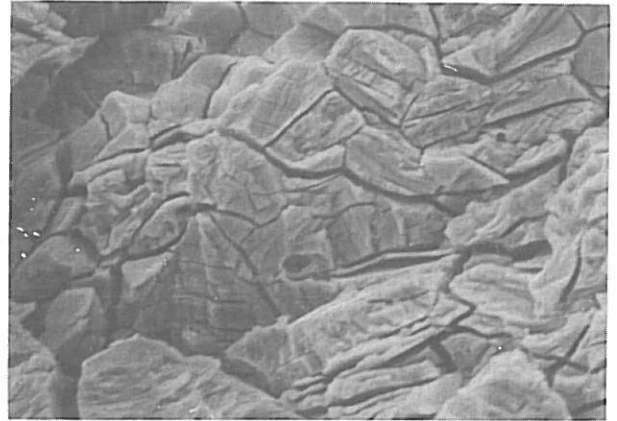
S.E.M. fractograph of a 310 austenitic stainless steel specimen strained in solution at a crosshead speed of 9.8 nm/s. Fractograph show details of fracture at the specimen edge, where intergranular fracture and quazi cleavage fracture are visible.
